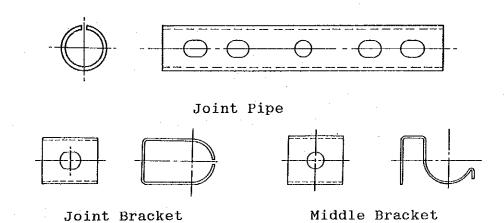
Standard Shape of Joint Pipe, Joint Bracket and Middle Bracket
